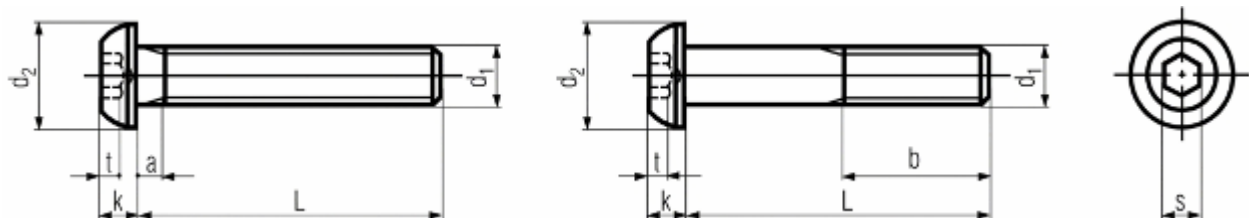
Dimensions of lens head M2-screws (ISO 7380).
